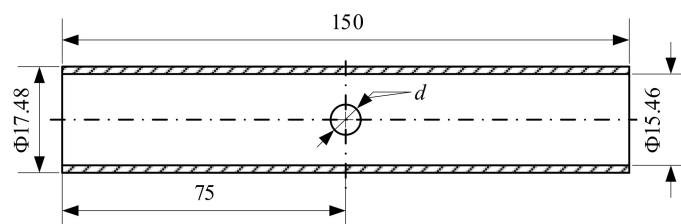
Test specimen for thin wall tube with holes. Unit: mm.
